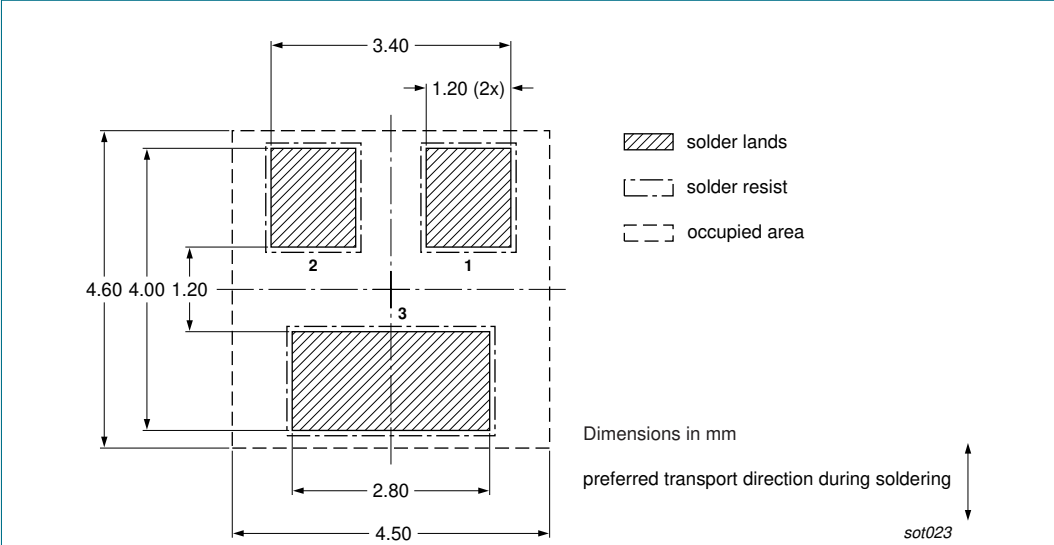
Wave soldering footprint SOT23 (TO-236AB)
